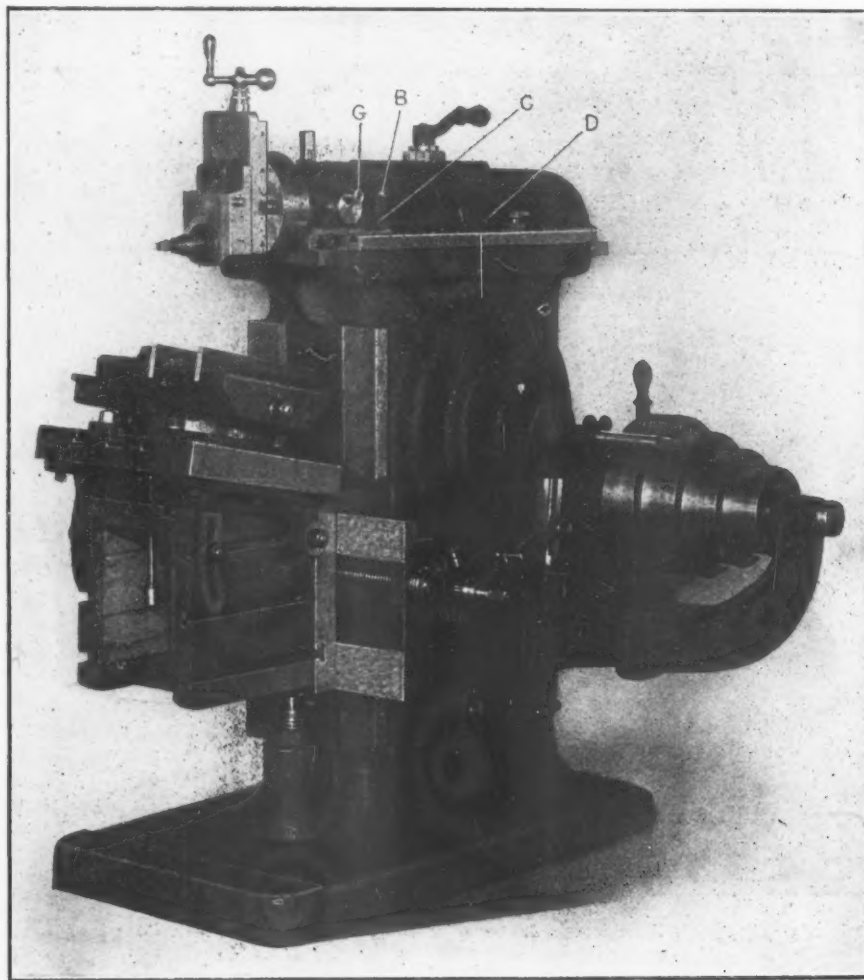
A 16-in. Stockbridge Back Geared Shaper with the New Automatic Down Feed.
